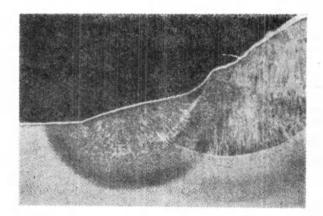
Macrosection of the toe profile TIG dressed with a damaged tungsten electrade. Same welding conditions as Fig. 7×5 .
